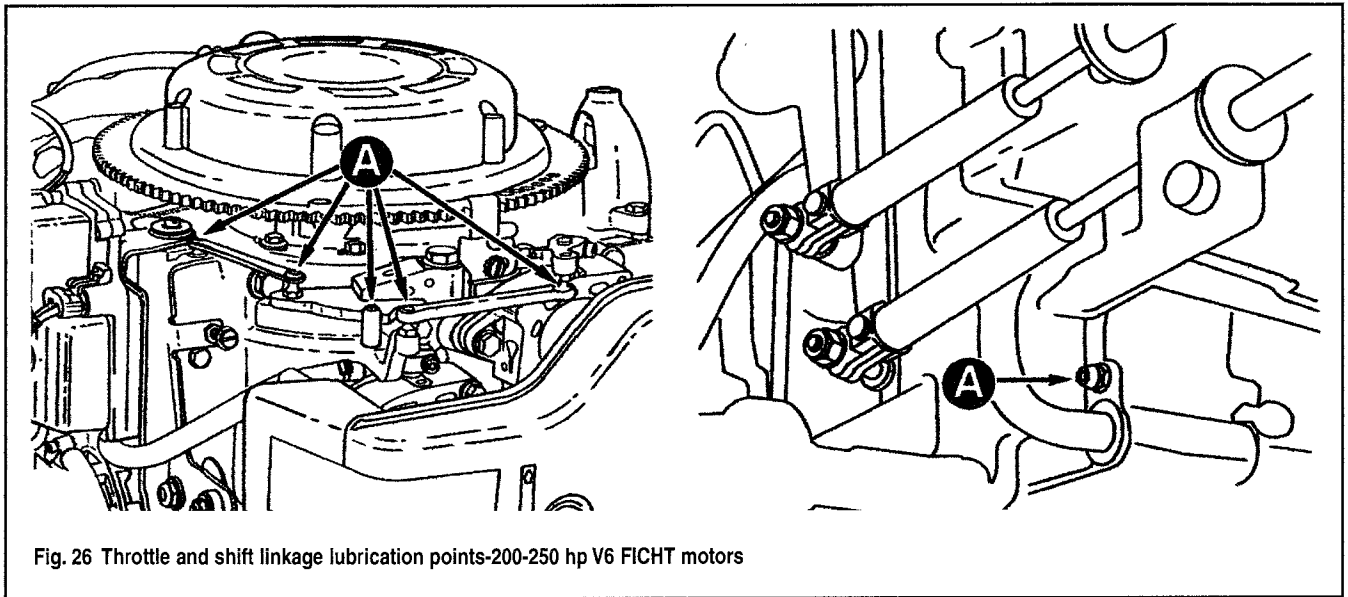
Throttle and shift linkage lubrication points-200-250 hp V6 FICHT motors
